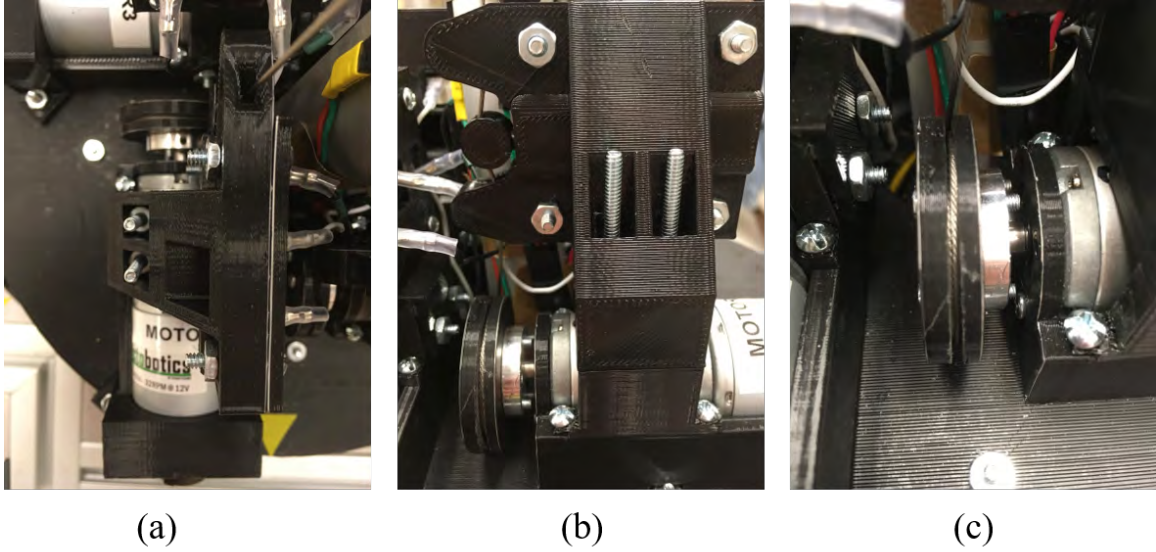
(a) The 3D-printed assembly of a single tendon motor
